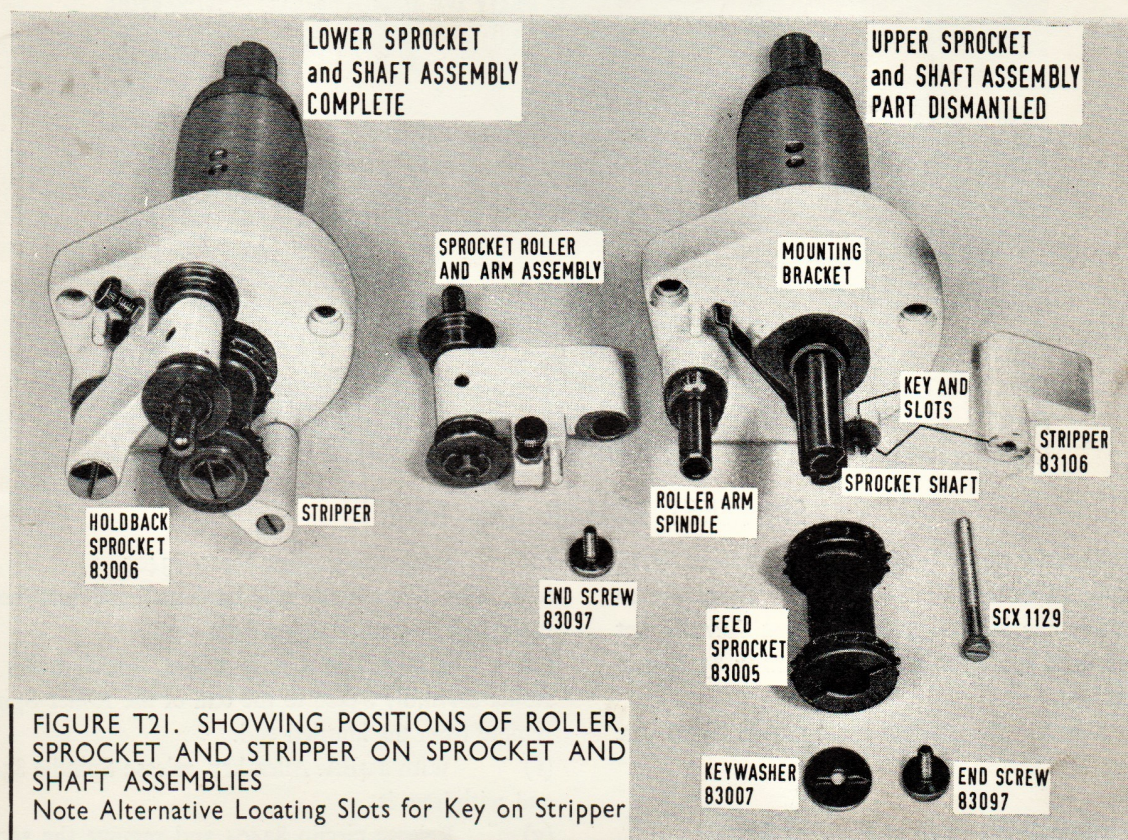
SHOWING POSITIONS OF ROLLER, SPROCKET AND STRIPPER ON SPROCKET AND SHAFT ASSEMBLIES
